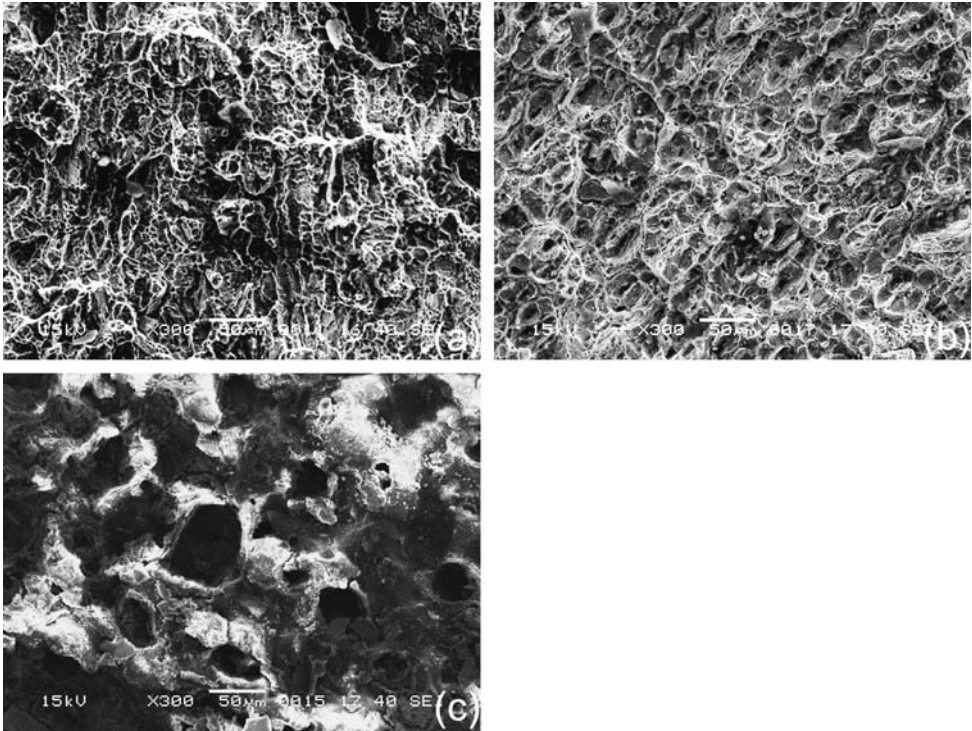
SEM fractographs showing brittle transgranular fracture surface and dimples in (a) weld zone, (b) light-etched HAZ, and (c) dark-etched HAZ
